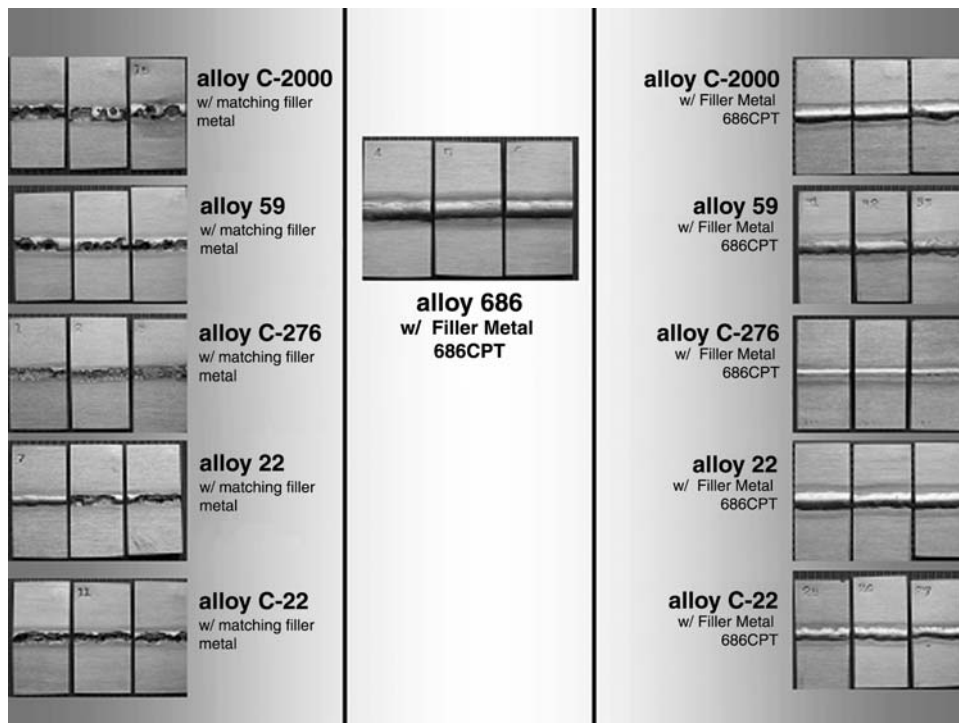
The advantage of using overmatching over matching composition welding products for joining corrosion-resistant alloys. Samples exposed in boiling (103°C) green death solution for 72 hours.
